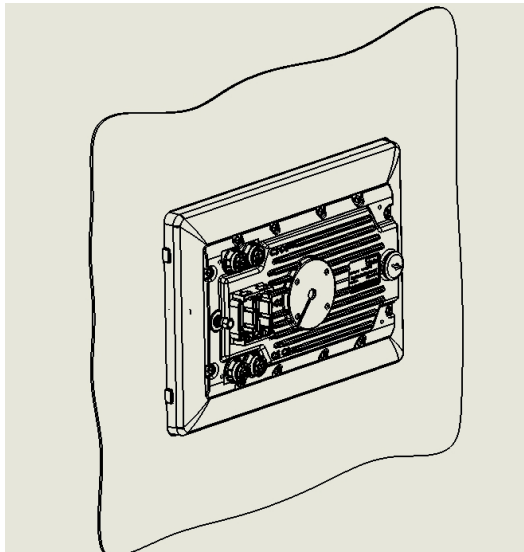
Pro Display 12 panel mount method. This assembly method is intended for assemblies where the installer can operate behind the assembly surface – for example cabinet doors.
